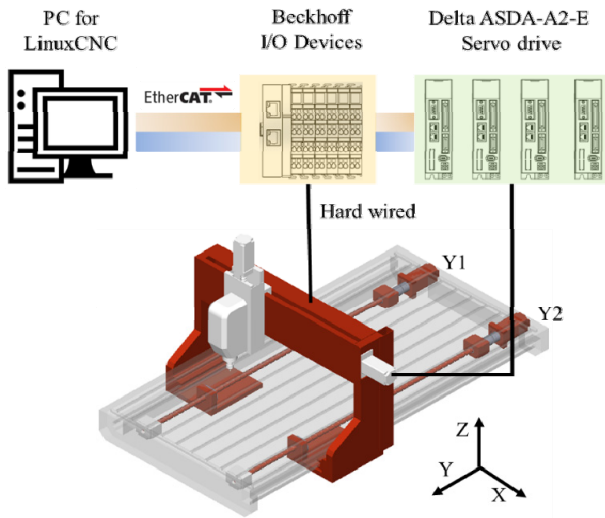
Hardware configuration of dual-servo gantry type machine tool
